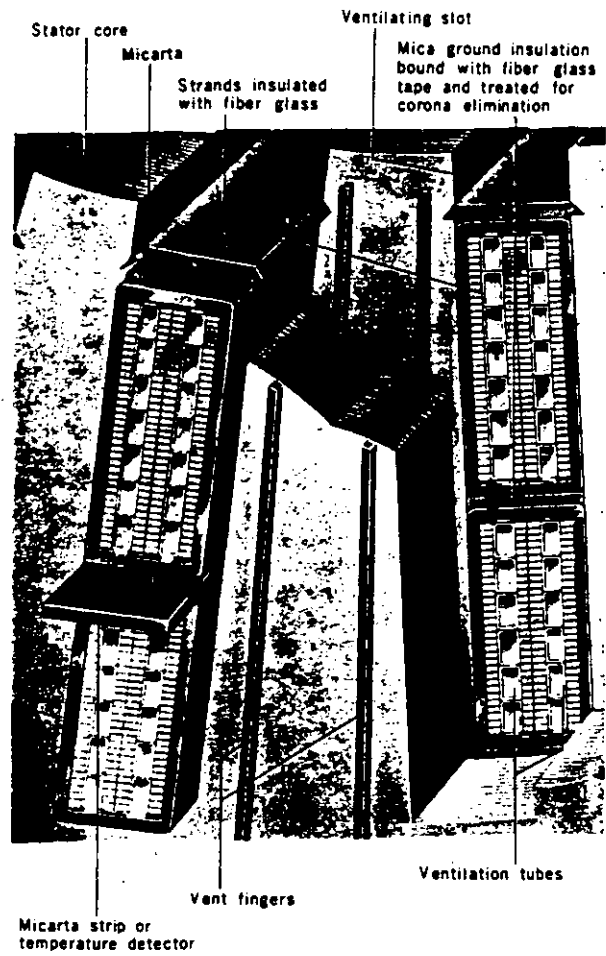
Cross-section of stator coil—inner cooled (double stacks of vent tubes)
